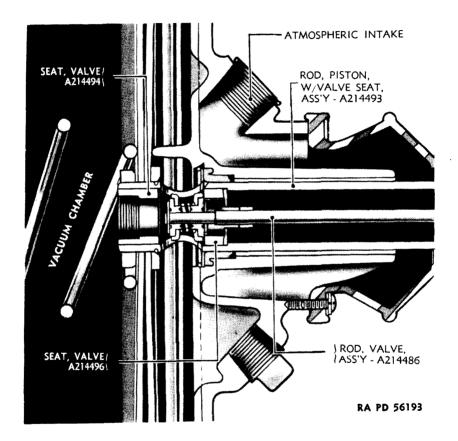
Vacuum Booster Valve Mechanism-Sectionalized
